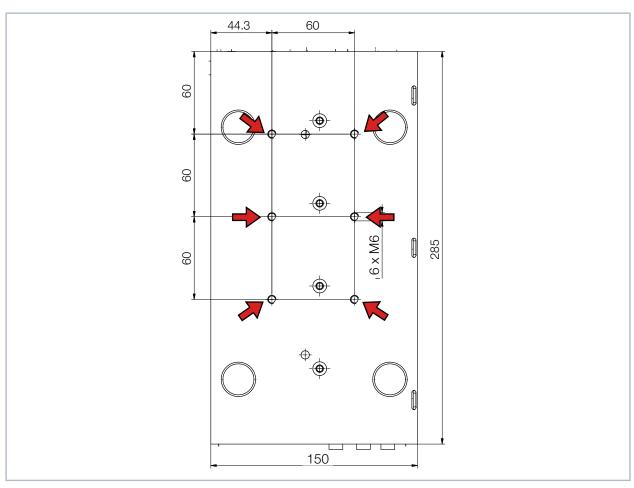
Fastening threaded holes LQM 20/200 without bottom plate
